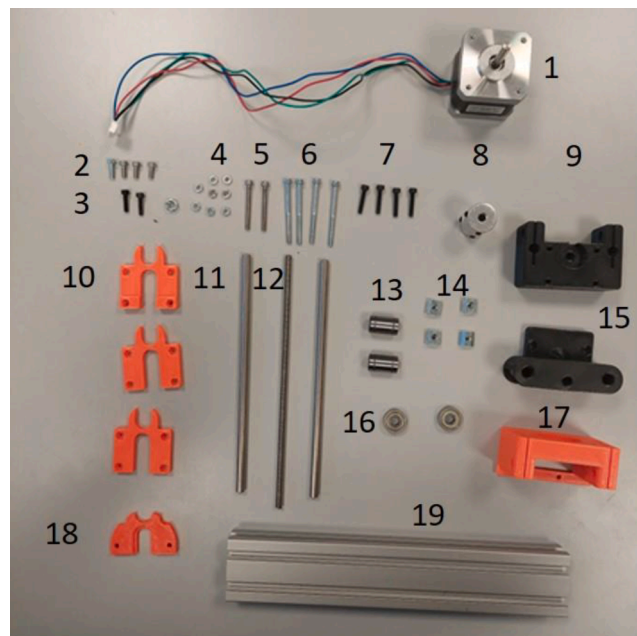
Required components for syringe pump assembly. 1- NEMA 17 stepper motor, 2 - $M3 \times 10$ screw, 3- $M3 \times 15$ screw, 4 - $M3$ nuts, 5- $M3 \times 30$ screw, 6- $M3 \times 40$ screw, 7- $M3 \times 20$ screw, 8- 8 mm coupling, 9- End-idler, 10- Clamp-syringe pump, 11-20 cm 8 mm Leadscrew, 12-20 cm 8 mm smooth rod, 13-8 mm Ball bearing, 14- $M3$ post-assembly nuts, 15- Carriage, 16- Miniature ball bearing, 17- End motor support, 18- Clamp- plunger retainer, 19- Aluminum rail support.
